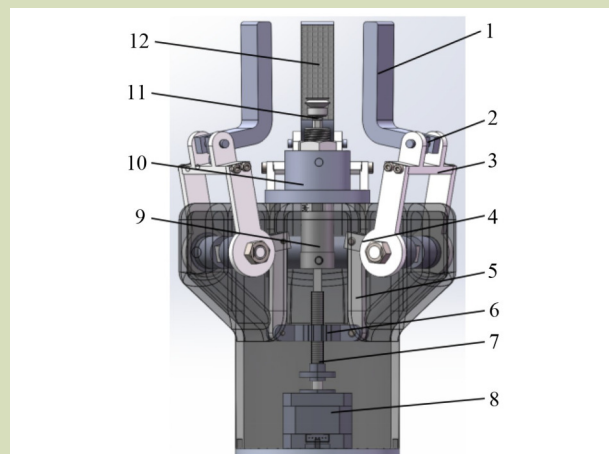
Overall structure of end-effector. 1, Clamp claw; 2, torsion spring; 3, four-hole connector; 4, connecting rod; 5, rocker; 6, screw nut; 7, ball screw; 8, motor; 9, cylinder; 10, column fixings; 11, vacuum suction cup; and 12, silicone pad.
